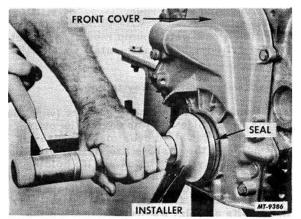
Pressing New Seal in Engine Front Cover Using SE1949 Installer and Wood Support Block
